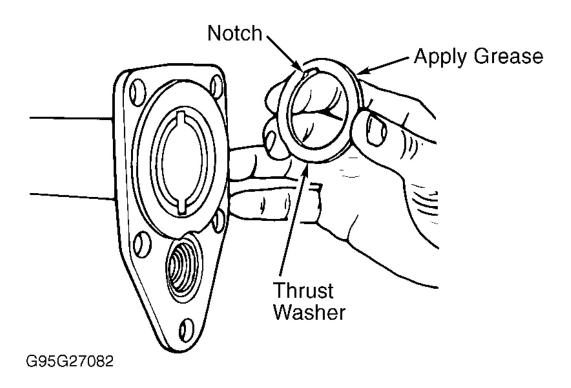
Installing Axle Tube Thrust Washer Courtesy of GENERAL MOTORS CORP.
